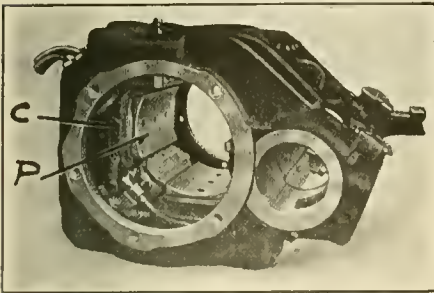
FRAME OF MOTOR SHOWING HOUSINGS AND ARMATURE REMOVED.
